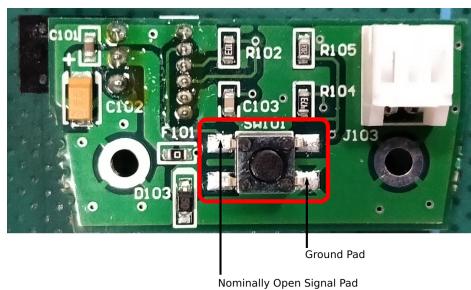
E-Pipette dispensing trigger switch daughter board with exposed pads
